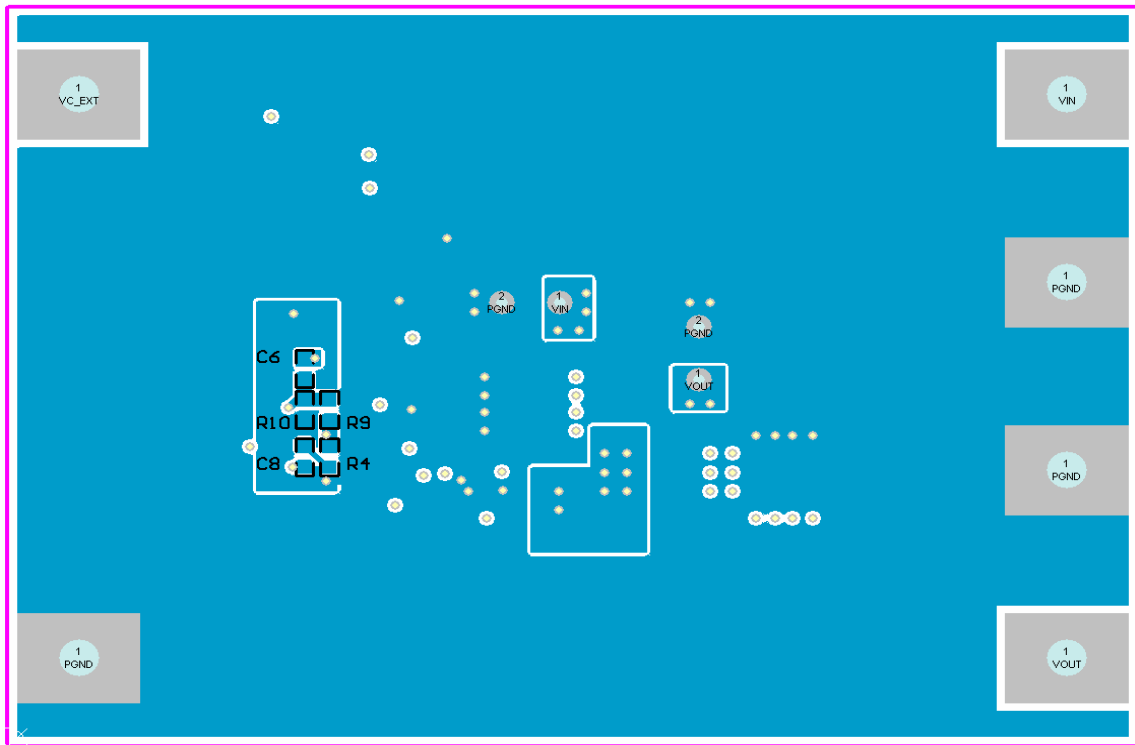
IRPP3637-06A Reference Design bottom layer layout.
